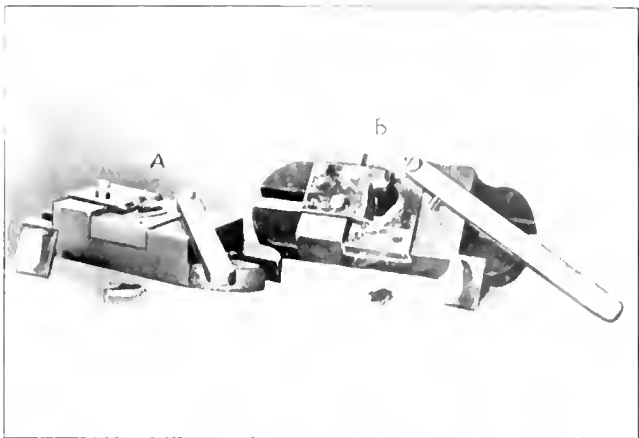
Trimming and Shaving Dies for Moving Cutter Blades
